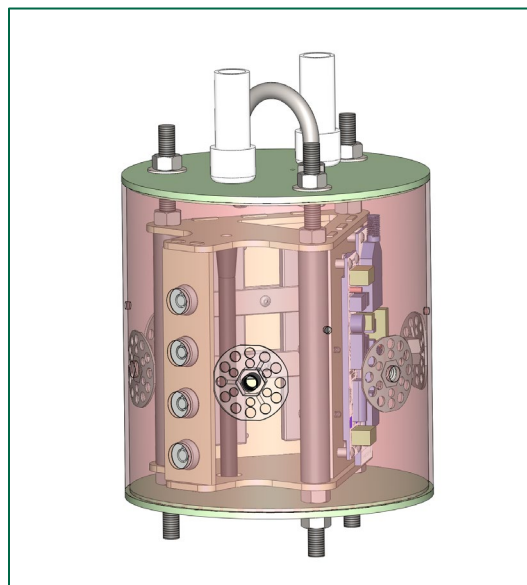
Assembled upper section avionics bay (with identical sled design to lower section avionics bay).
